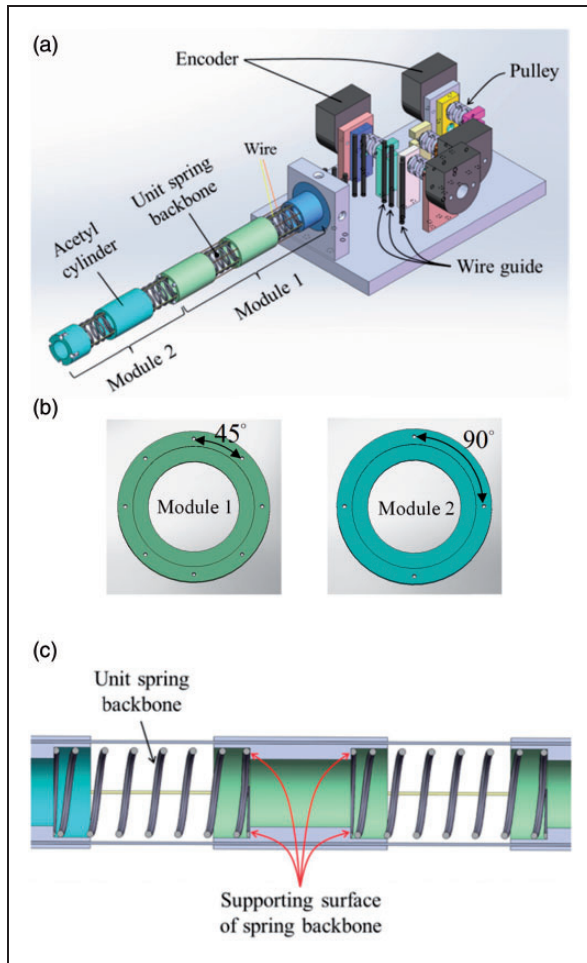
Design of the 4-DOF master device. (a) Assembled state. (b) Cross-sectional view of a cylinder (front). (c) Cross-sectional view of a cylinder (side).
